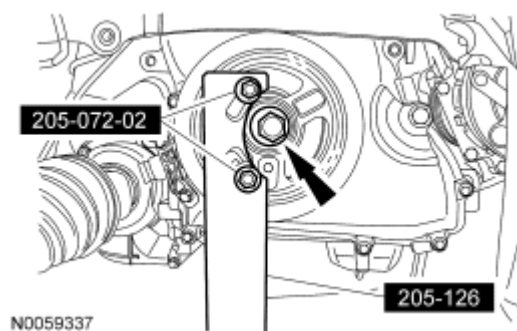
Using Special Tools (205-126 And 205-072-02)
